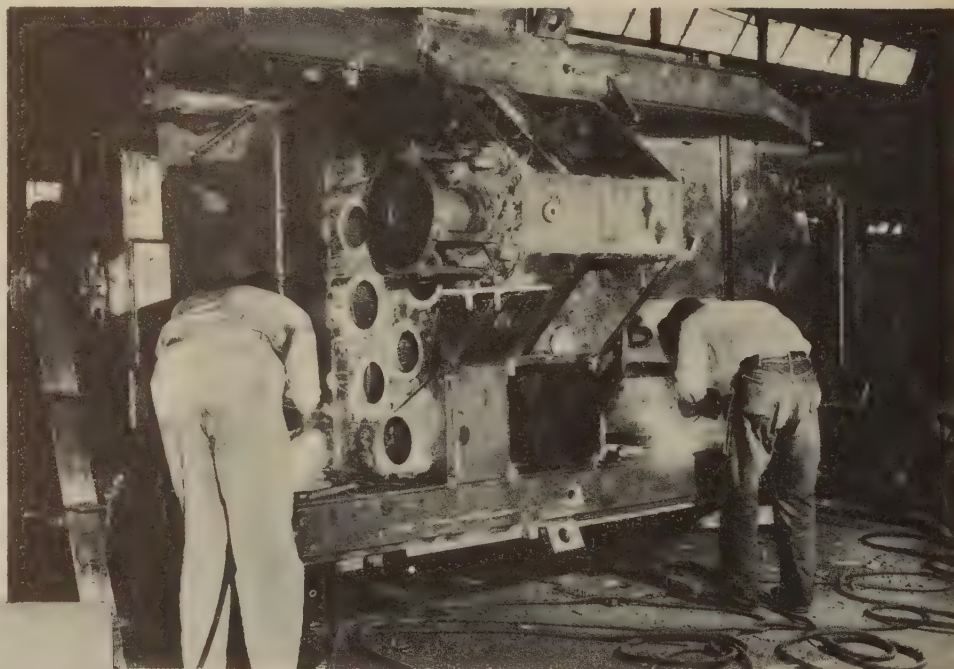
This special semi-automatic gear flame hardening unit is being built for the heat treatment of the 23 in. final drive gears.
